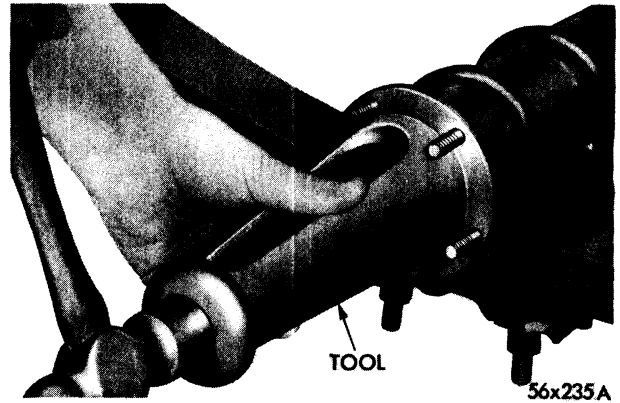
Installing Axle Drive Shaft Bearing Cup with Tool C-413
